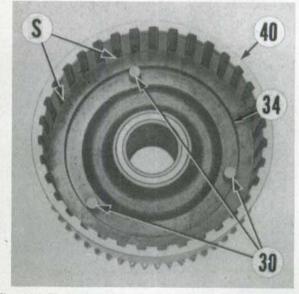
To separate actuating housing (34) from clutch housing (40), drive wedges into spline grooves at the access spaces (S) located around inside diameter of clutch housing to compress retaining ring.
